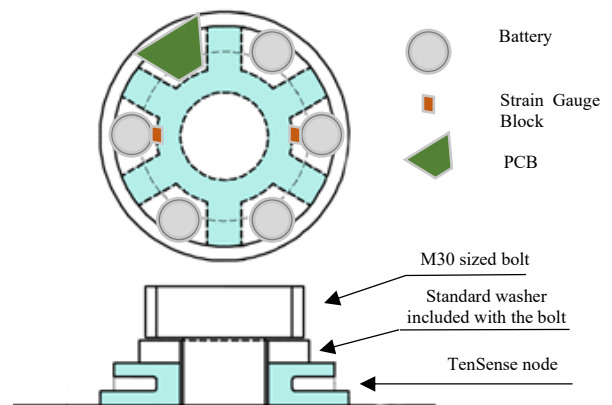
Orthographic representation of the designed washer, top and side view, together with electronics component placement.
